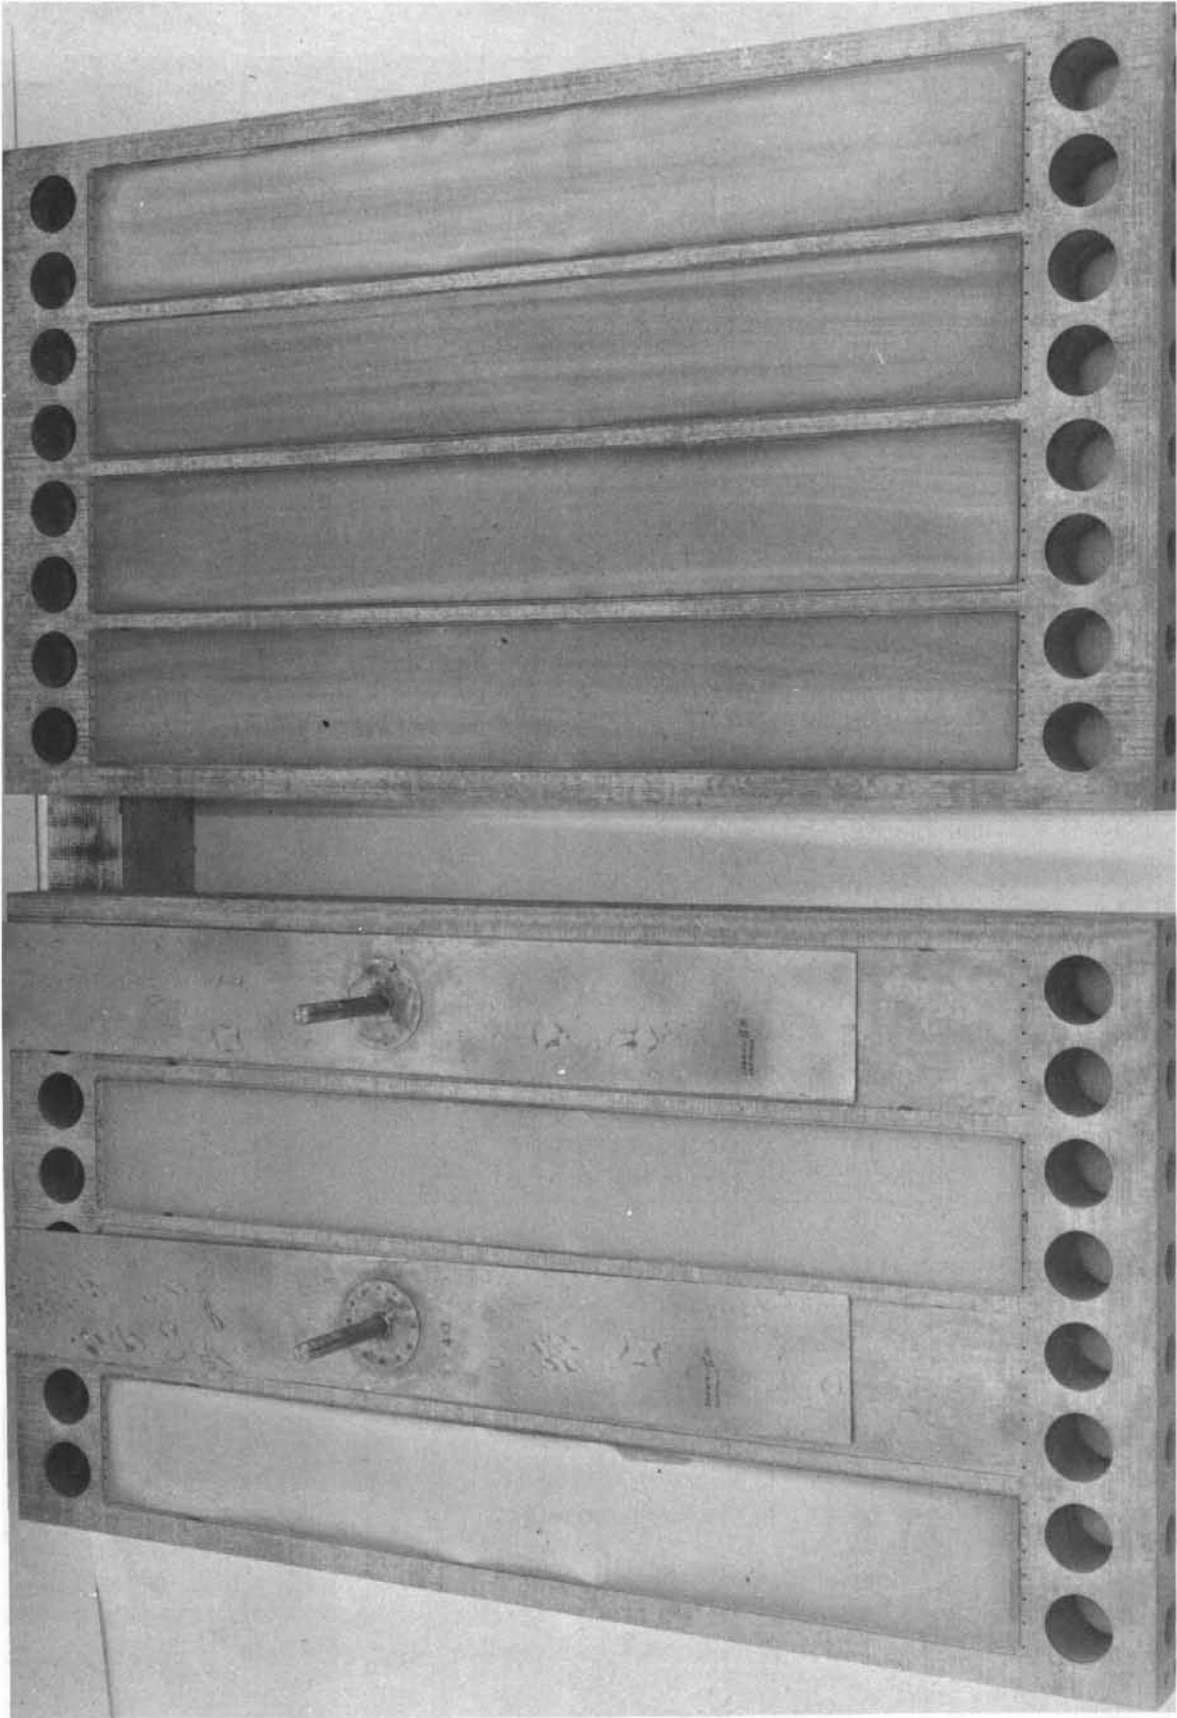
Endplate Assemblies of Pilot-Plant Stack AP-5664
